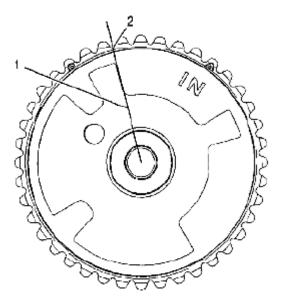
Locating Camshaft Position Actuator Courtesy of SUZUKI OF AMERICA CORP.
